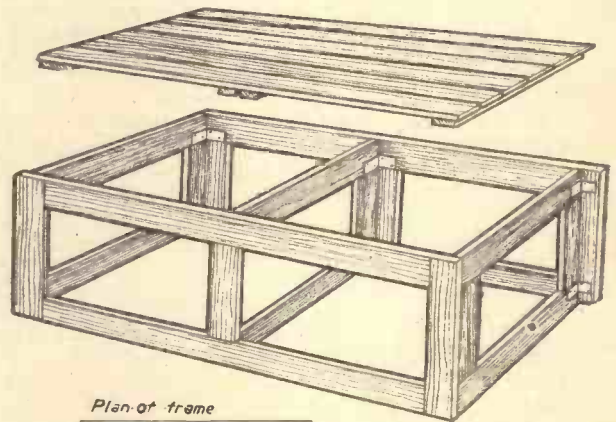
(Right).—This type of stage, built up of collapsible sections, is easily stowed away when not in use.
